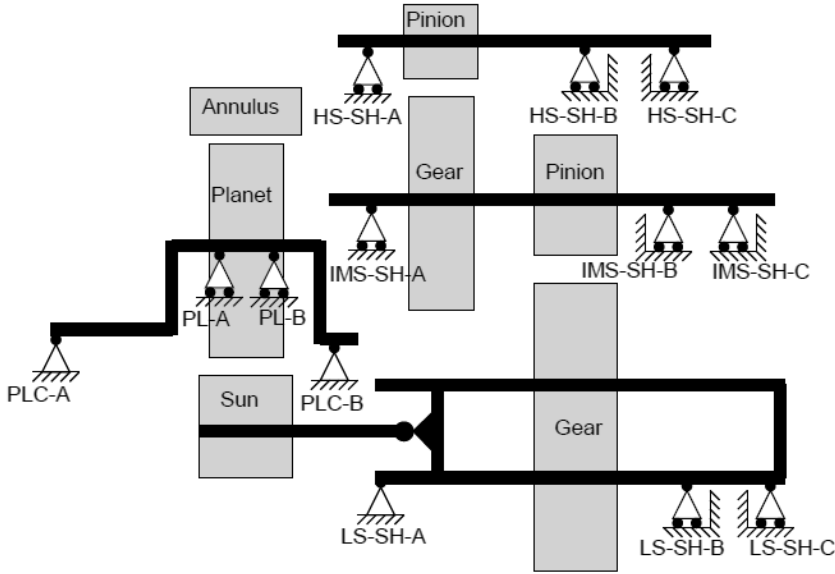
View of internal components of the test gearbox and the nomenclature and locations of the bearings and gears.
